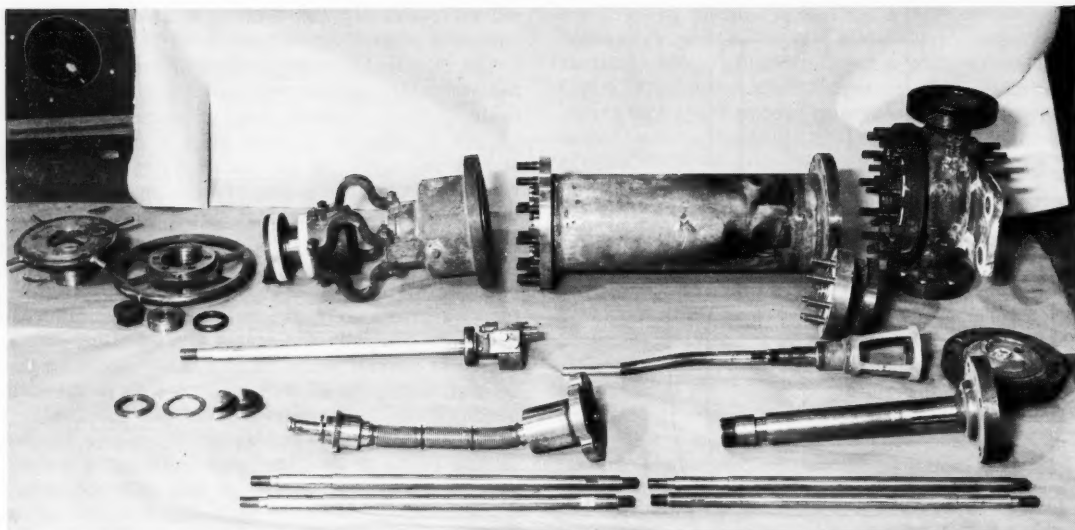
Components for a rotating plug valve with a flexible bellows seal.
